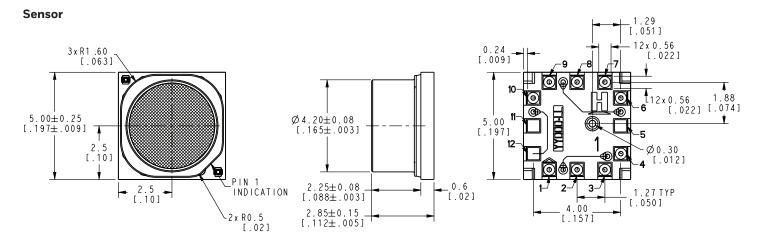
SHORT PORT AND RECOMMENDED PCB PAD LAYOUT DIMENSIONS (FOR REFERENCE ONLY: MM [IN].)
